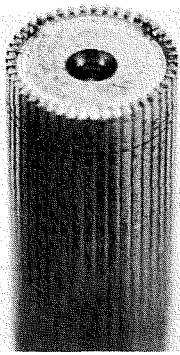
Control-grid winding mandrel and welding electrode.
